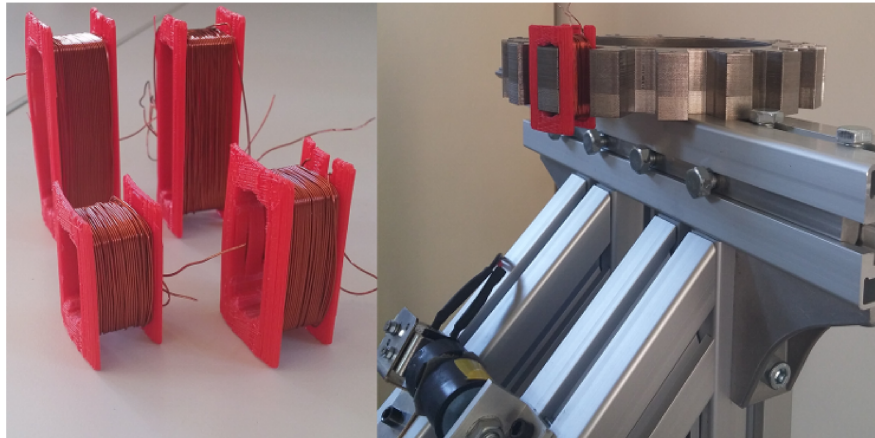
A set of wound coils ready for testing and a coil mounted on the stator.
